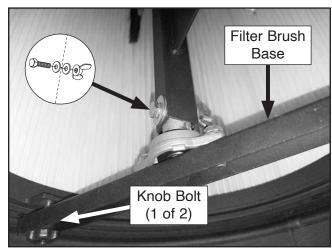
Filter brush base attached to filter brush assembly and canister filter assembly.
